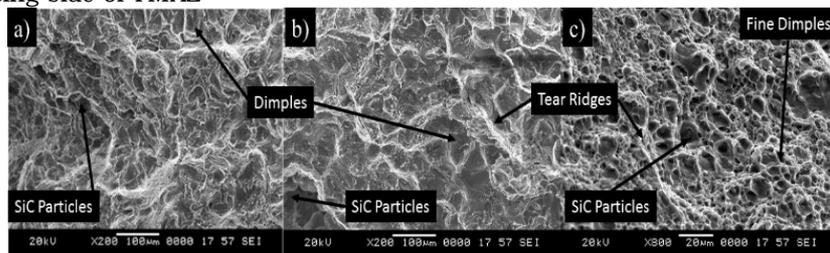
SEM image of the fracture surfaces. (a) Base composite, (b) friction stir welded composite across the direction of weld, tool rotational speed of 1000 rpm and welding speed of 80 mm/min. (c) friction stir welded composite in the direction of weld tool rotational speed of 1000 rpm and welding speed of 80 mm/min.
